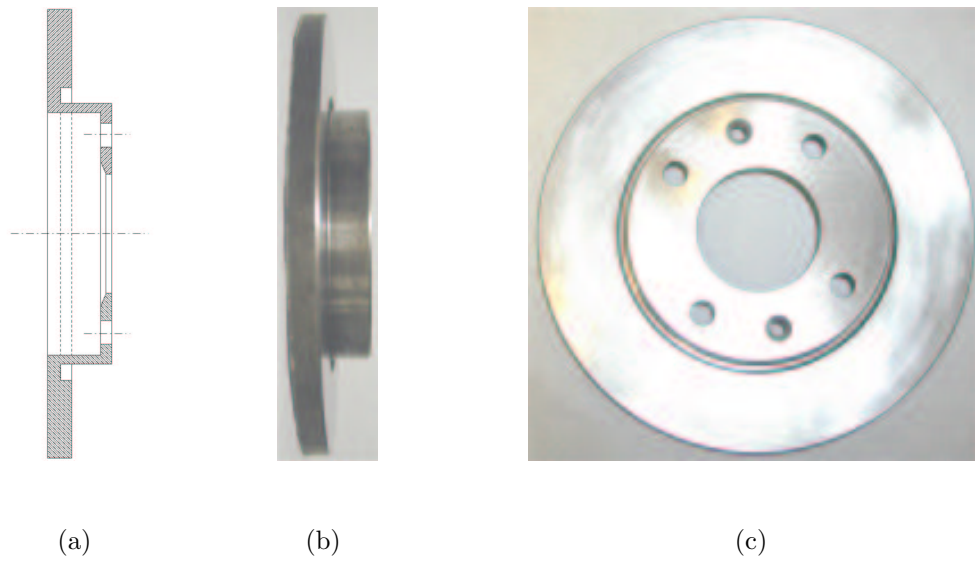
Typical brake disc with a “top-hat” shape: (a) cross-section sketch, (b) side-view, and (c) top-view.
